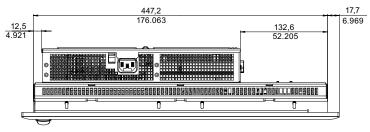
Dimension drawing of the touch screen device with 19" display
